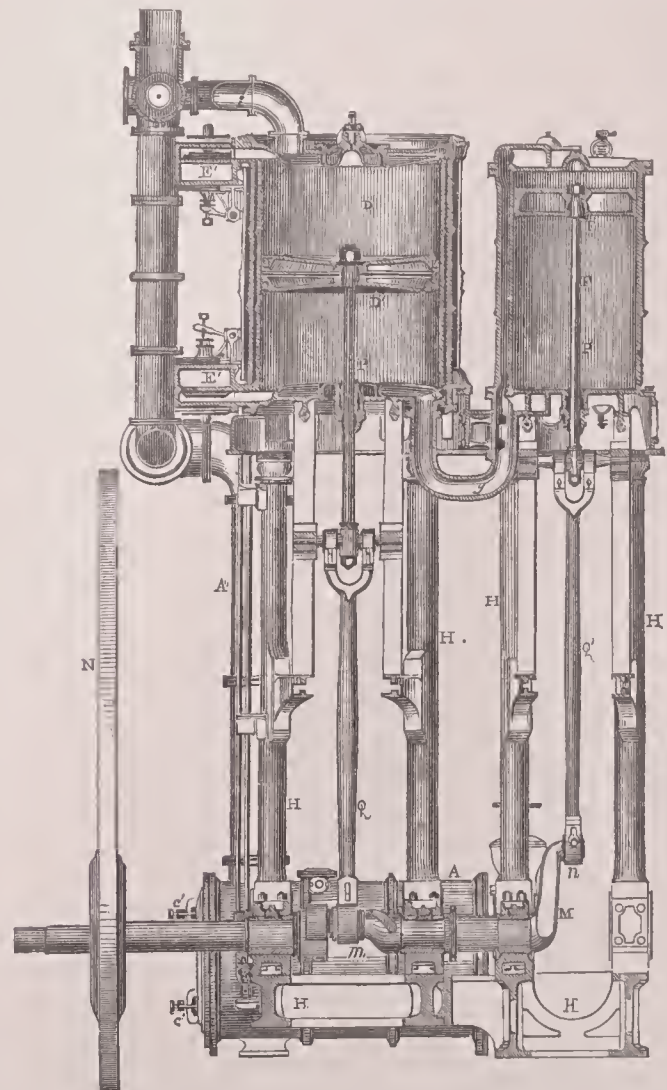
Belou's hot-air engine—elevation and partial section.
